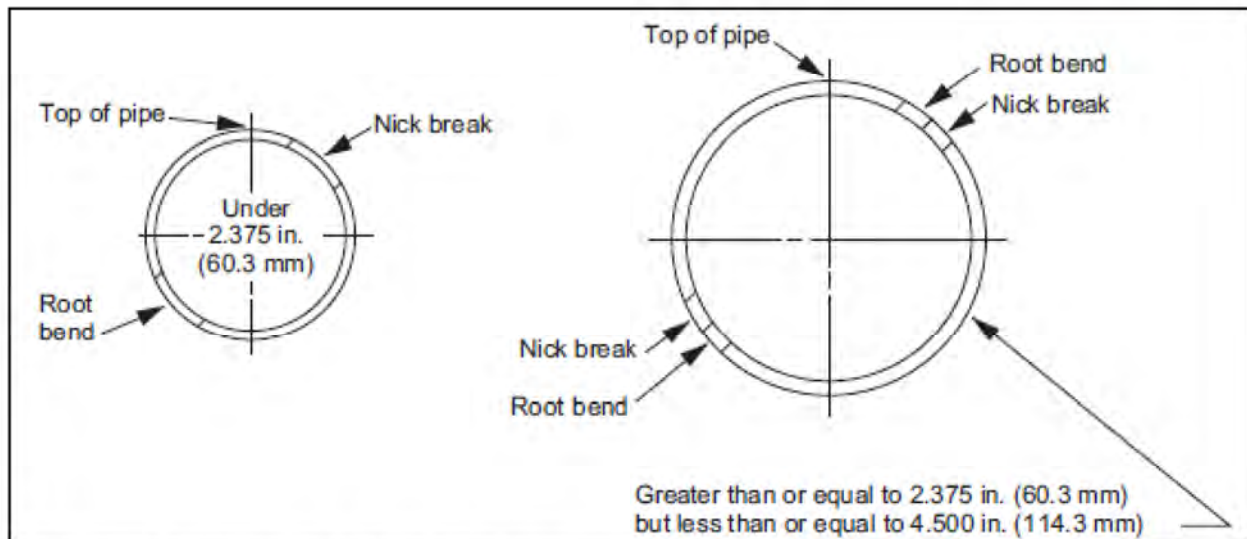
Location of Oxy-Acetylene Welder Qualification Butt Weld Test Specimens
